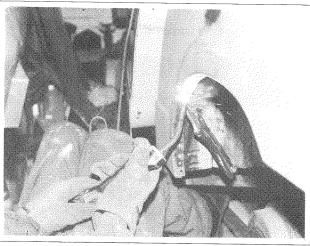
Due to the force of gravity, upside down welding is not as easy and is more messy than 'the right way up' so if the body is to come off anyway, this part could be left until the body itself can be turned upside down.
